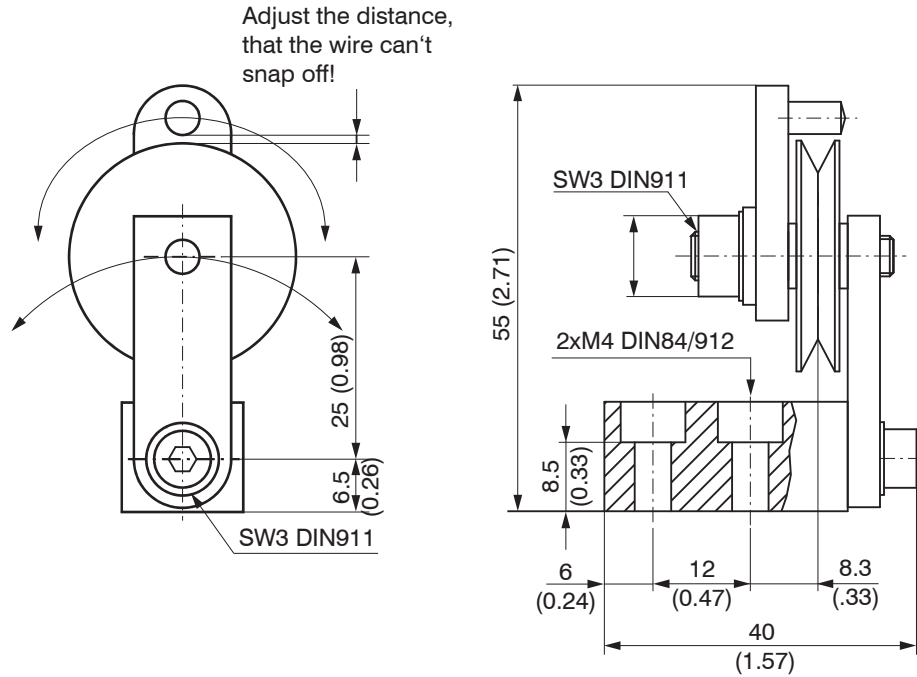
Guide pulley TR1-WDS with mounting socket, dimensions in mm (inches), not to scale
